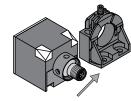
Undo the locking screw Fig. 12: Pull the sensor out of the mounting bracket
